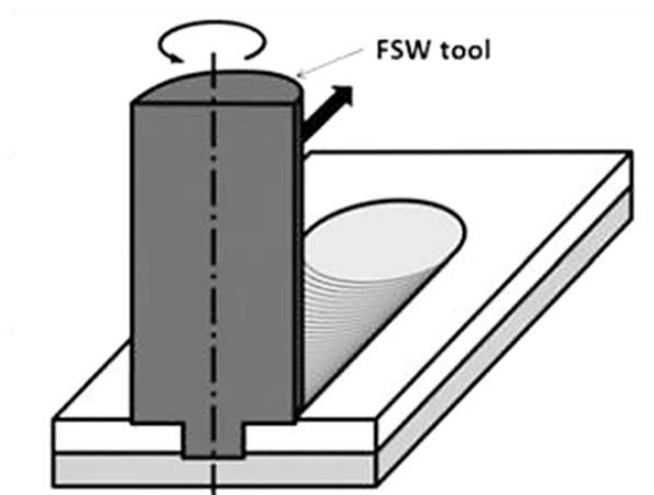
Schematic configuration of FSW lap welding [165]
